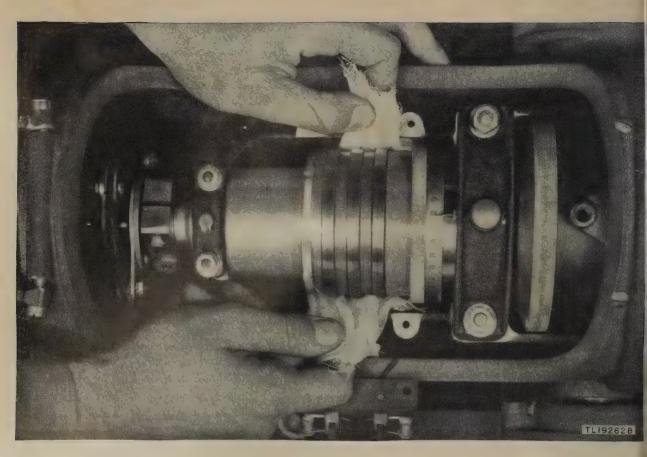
Bearing Indicator BC-1159-A, rotating mount.
